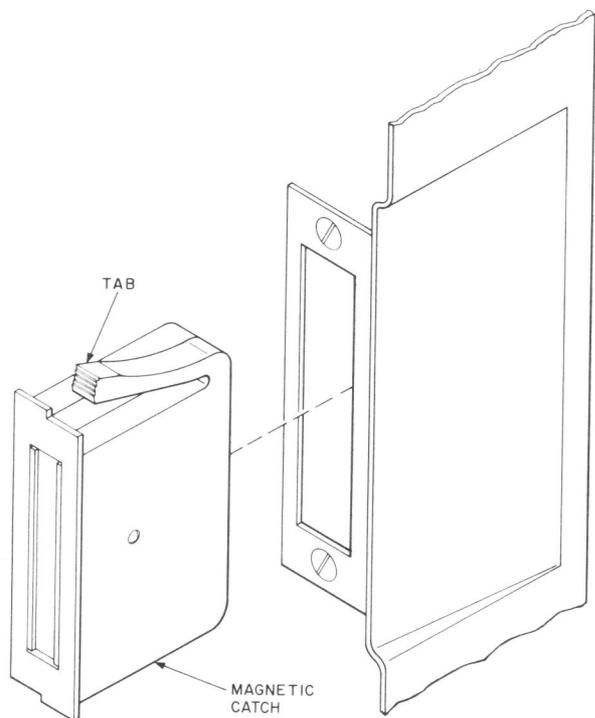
Partial View of 526A Housing Assembly, Installation of Magnetic Catch
